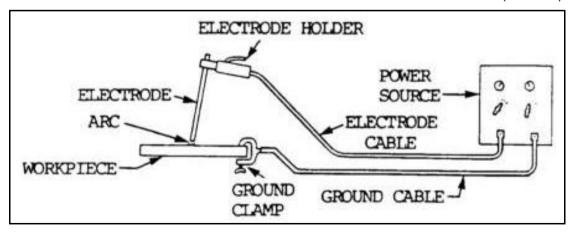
Shielded Metal Arc Welding (SMAW)
